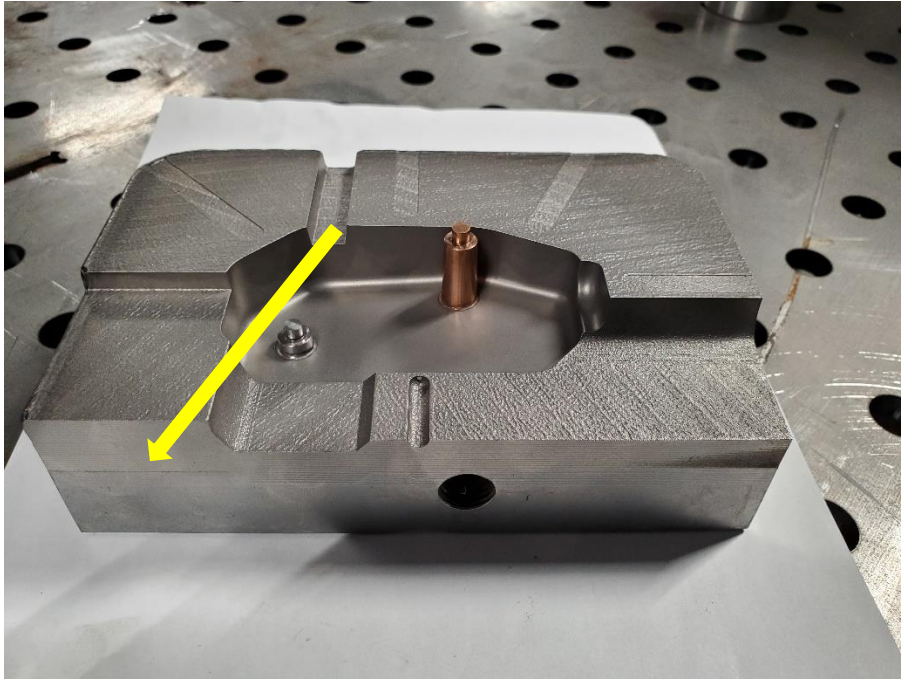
Hybrid injection molding die. Welding seam identified.
